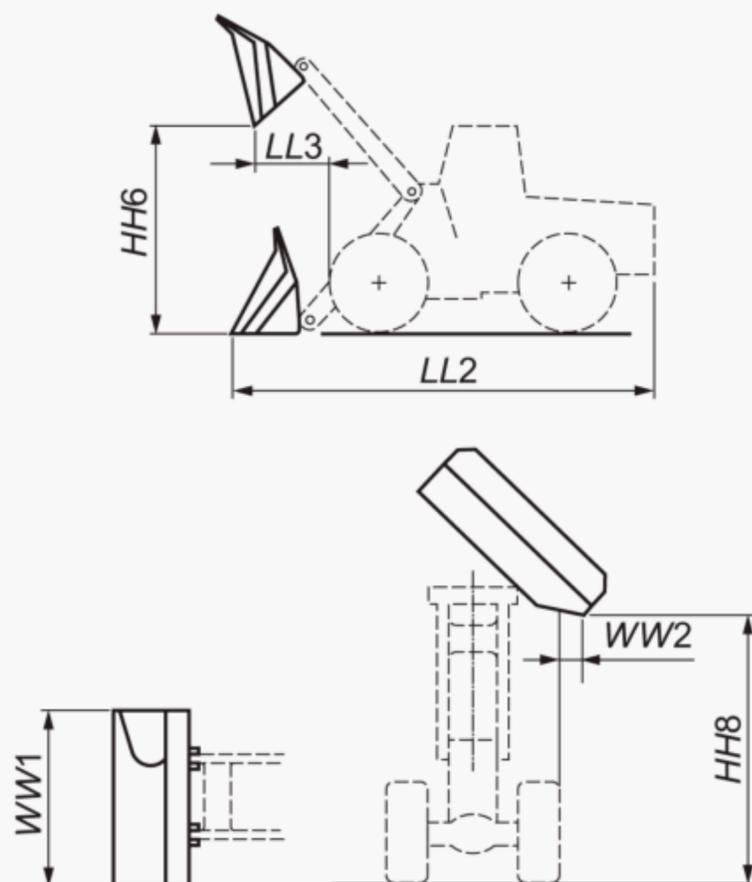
Dimensions of equipment and side dump bucket installed on loaders
